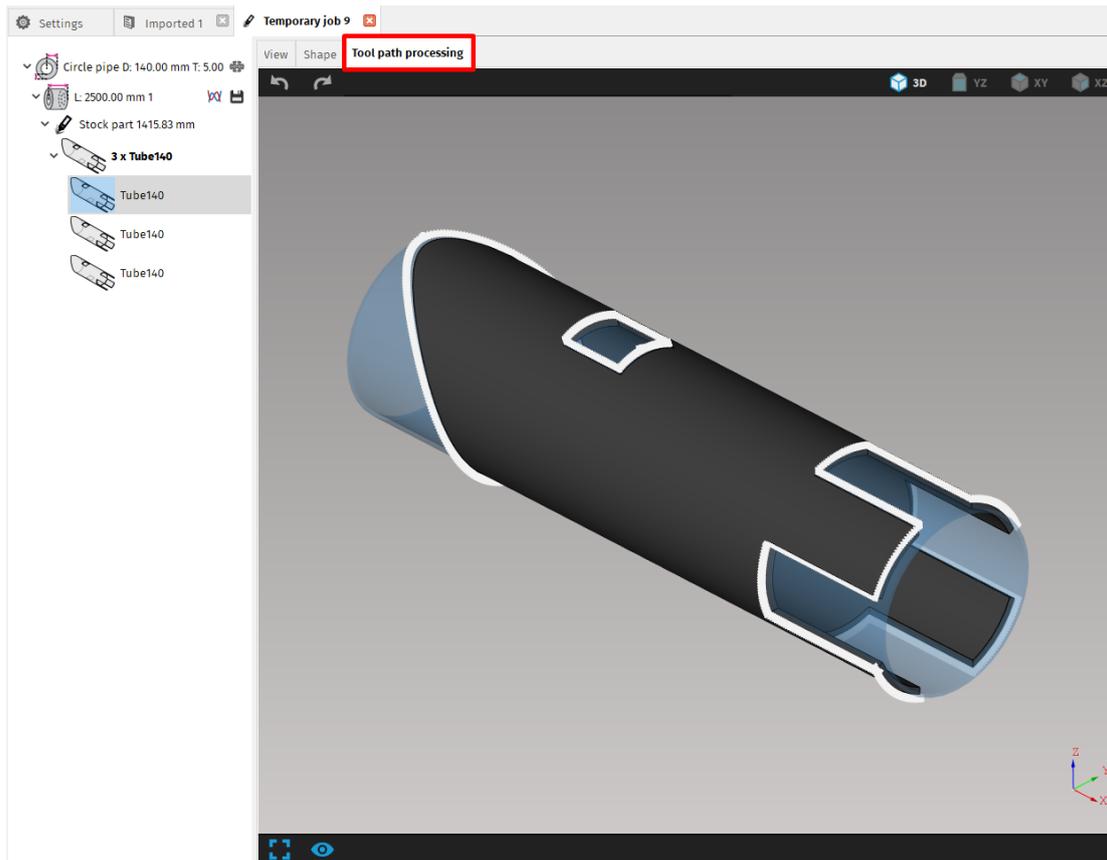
Tool path processing – limited and compensated according to set machine and tool
